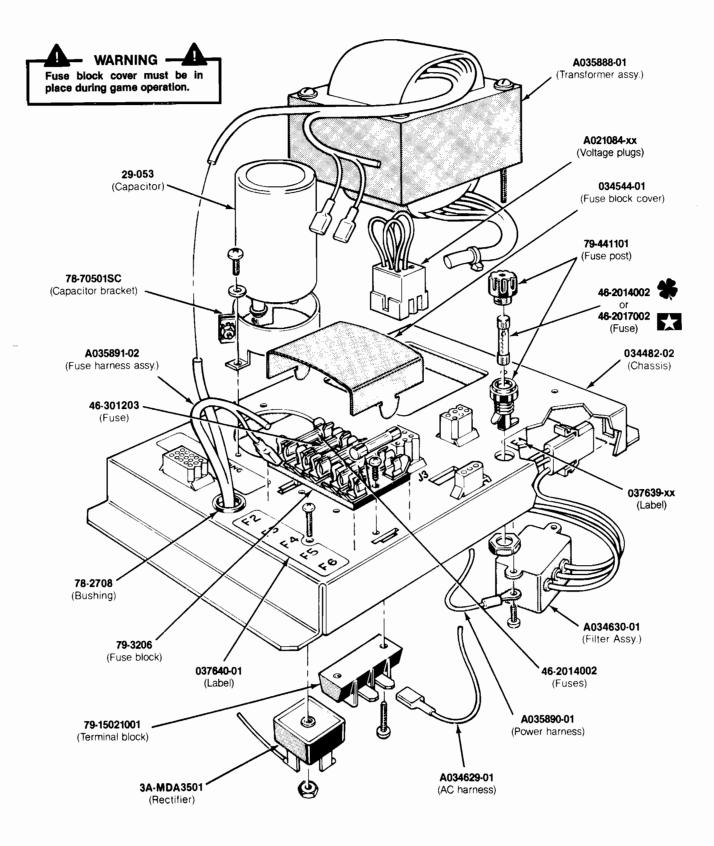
Color Raster-Scan Power Supply Assembly A037671-01 & -03 H
